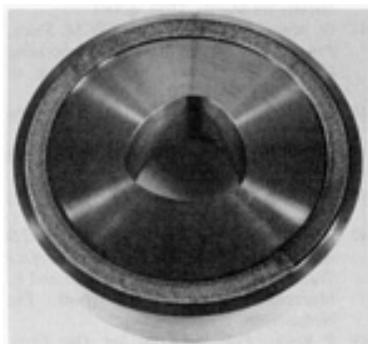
Inconel alloy shaft seal test ring particle-injected with WC. Source: Ref 63
